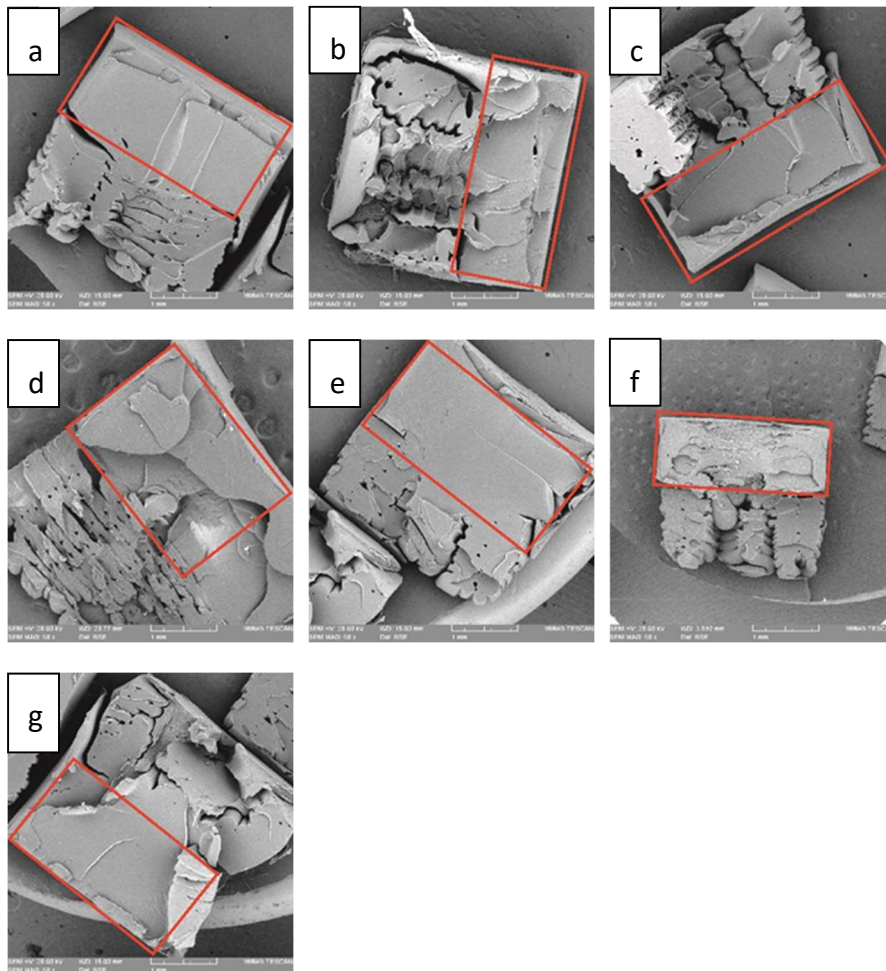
SEM images showing the fracture sections of specimens, in which the IM part is marked in red square: (a) NJ25; (b) NJ50; (c) NJ75; (d) MC50; (e) FC50; (f) MT50; (g) FT50.
